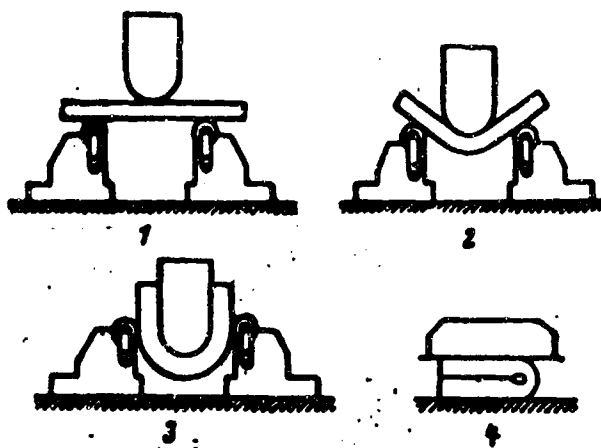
Flanging test of metal. 1 - position before test, 2 - test to determined angle, 3 - test to parallelism of sides, 4 - test to full contact of sides.
